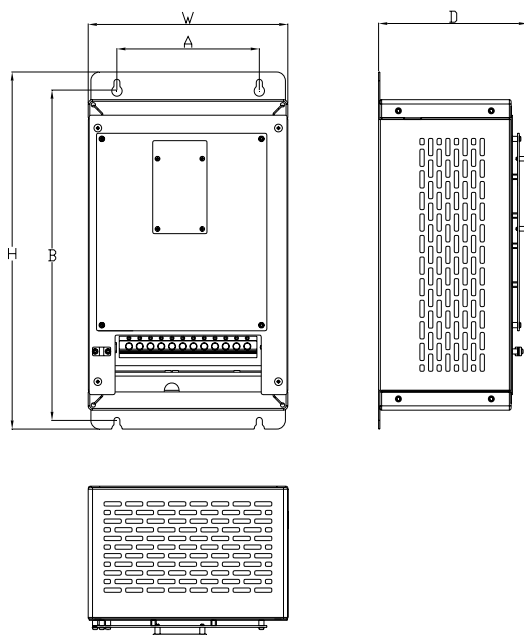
Installation Dimension of Elevator Integrated Drive Controller (with casing)
